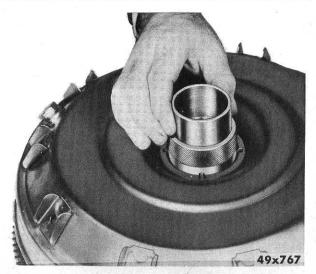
Pushing Seal Ring off Locators, Using Pilot (Tool SP-788, Part of Tool C-885)
